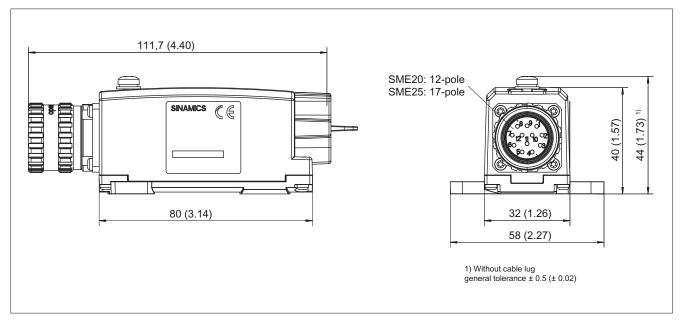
Dimension drawing of Sensor Module External SME20, all data in mm and (inches), order number 6SL3055-0AA00-5EA3
